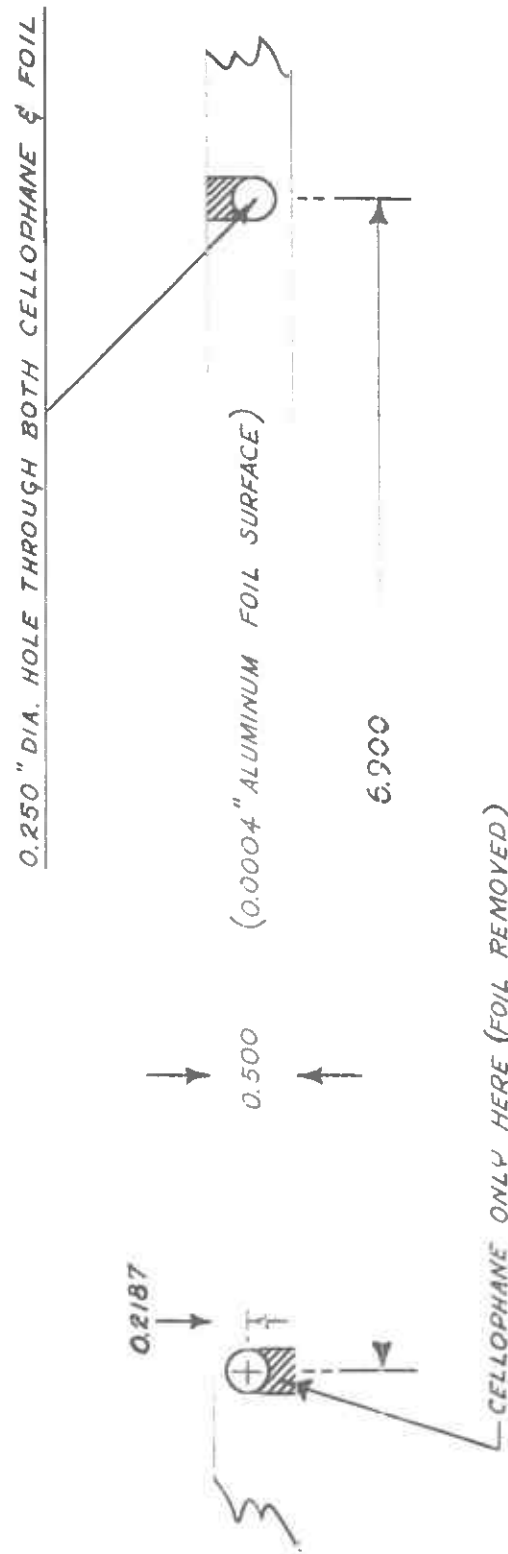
EXPLODING FOIL IGNITION TAPE.
